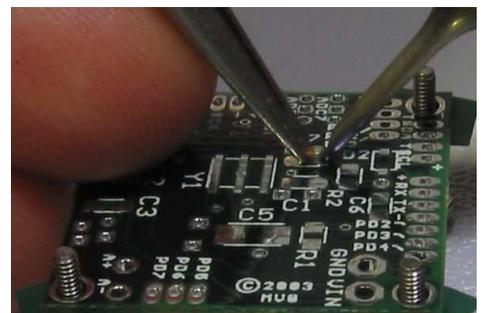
Place component on pre-tinned pad and melt solder to fix in place
